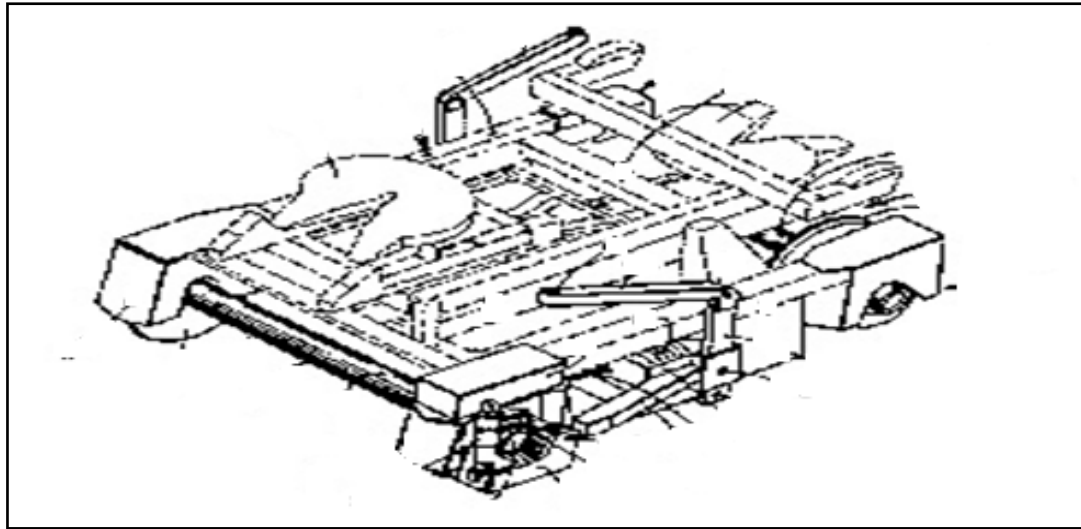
Perspective view of twin-axle rail-bogie [5]
